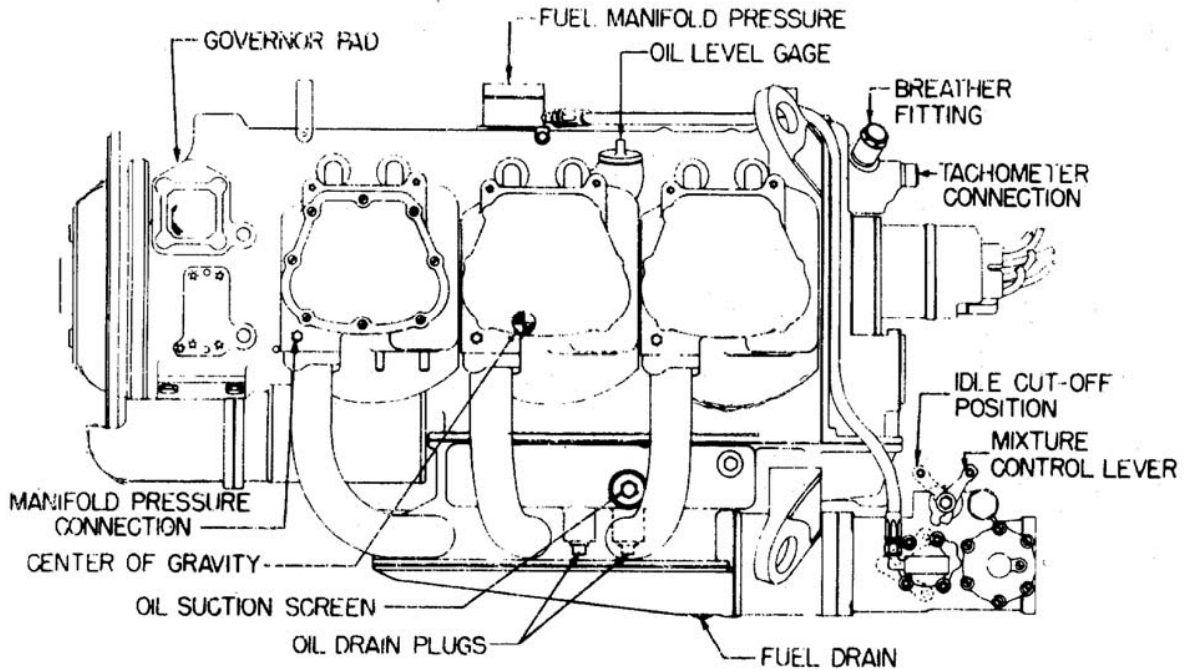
Installation Drawing – Left Side View – IO-540-A, -G, -P, -S
